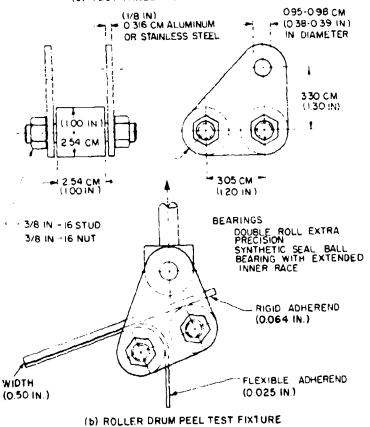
Floating Roller ("Bell") Peel Specimen and Fixture (from ASTM D3167).
